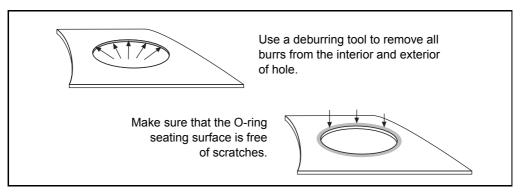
Removing burrs and inspecting the O-ring seal surface
